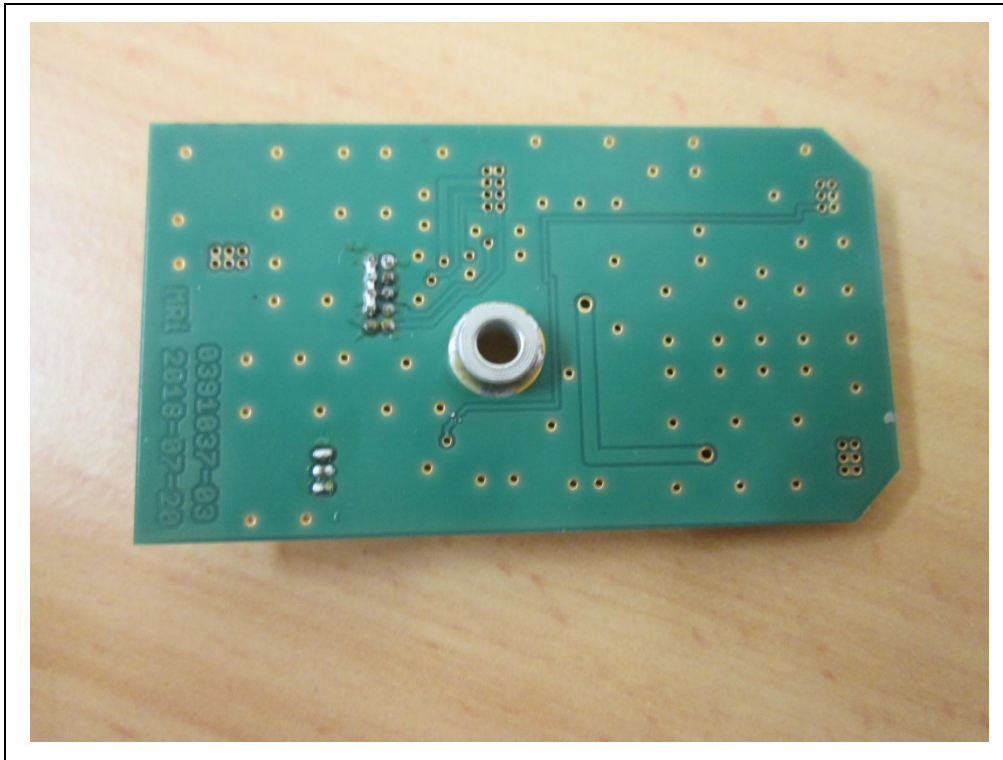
EUT#1, view of PCB 2 side 1
